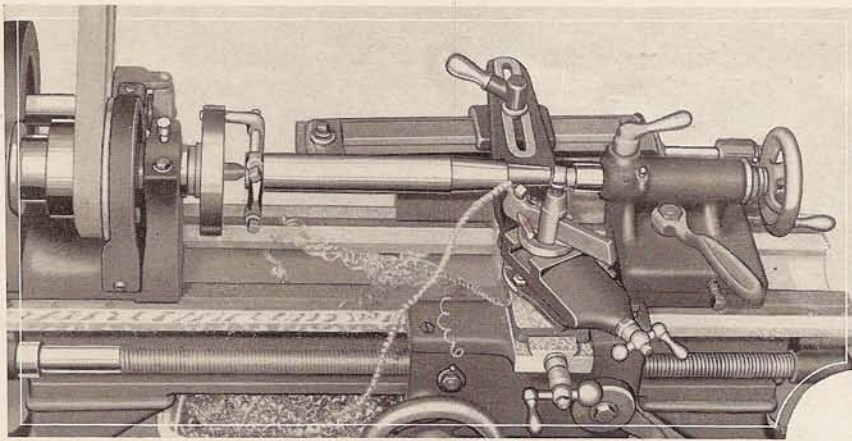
No. 22-9-inch Junior Lathe Equipped with Graduated Taper Attachment for Machining Tapered Shafts. See Attachments Listed on Page 12
